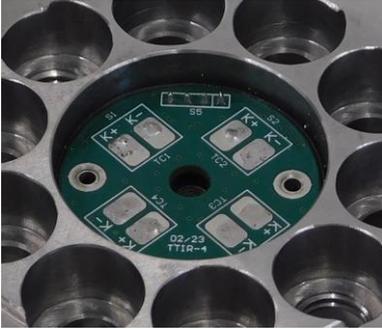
IRTS-P Tempdisc: Rotor with contact plates for soldering
